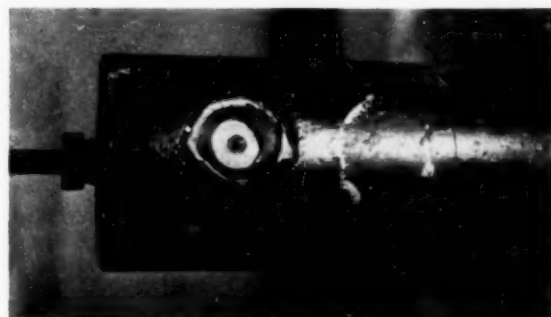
FAILURE OF WELD ON AISI-1025 CARBON STEEL
